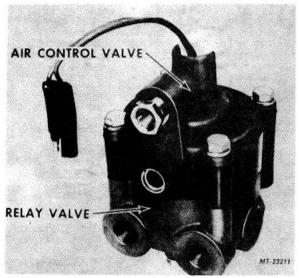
Antilock Relay (AR) Valve MAINTENANCE
